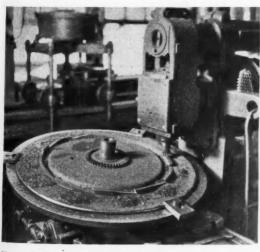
Milling the ratchet on an inking disk for a Gordon press.
